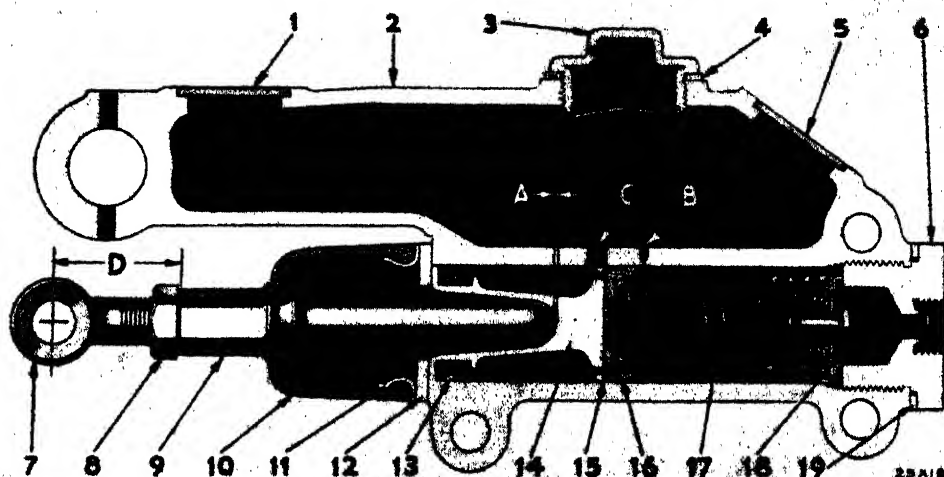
HYDRAULIC BRAKE MASTER CYLINDER. (Courtesy, Chrysler Corporation.)
